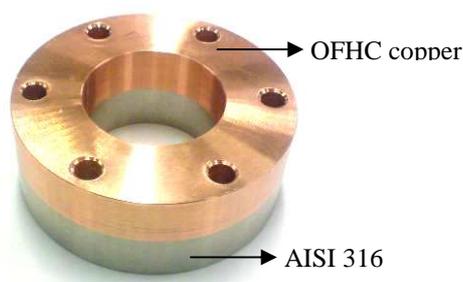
Diffusion bonded AISI 316L to OFHC copper specimen machined for leak test.
